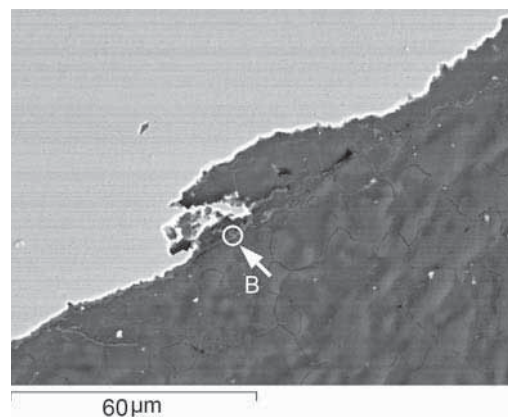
Failure profiles produced during AZ91 spot welding using a dwell time of 4 seconds, a rotational speed of 3 000 rpm and a plunging rate of 25 mm/s
